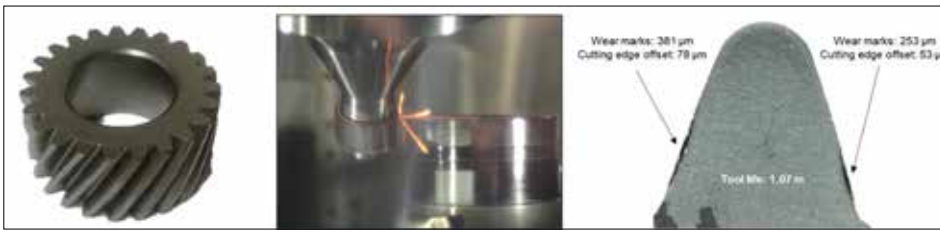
Workpiece, test setup and wear result on the tungsten carbide tool by Zapf et al. [15].
